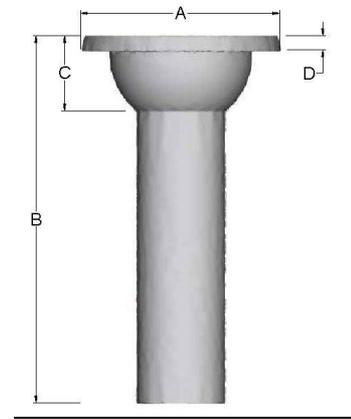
Dimensions of upper and lower die with fixture Compare shapes
